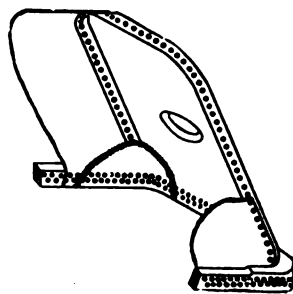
PATCH AT JUNCTION OF SIDE AND DOOR SHEET.
